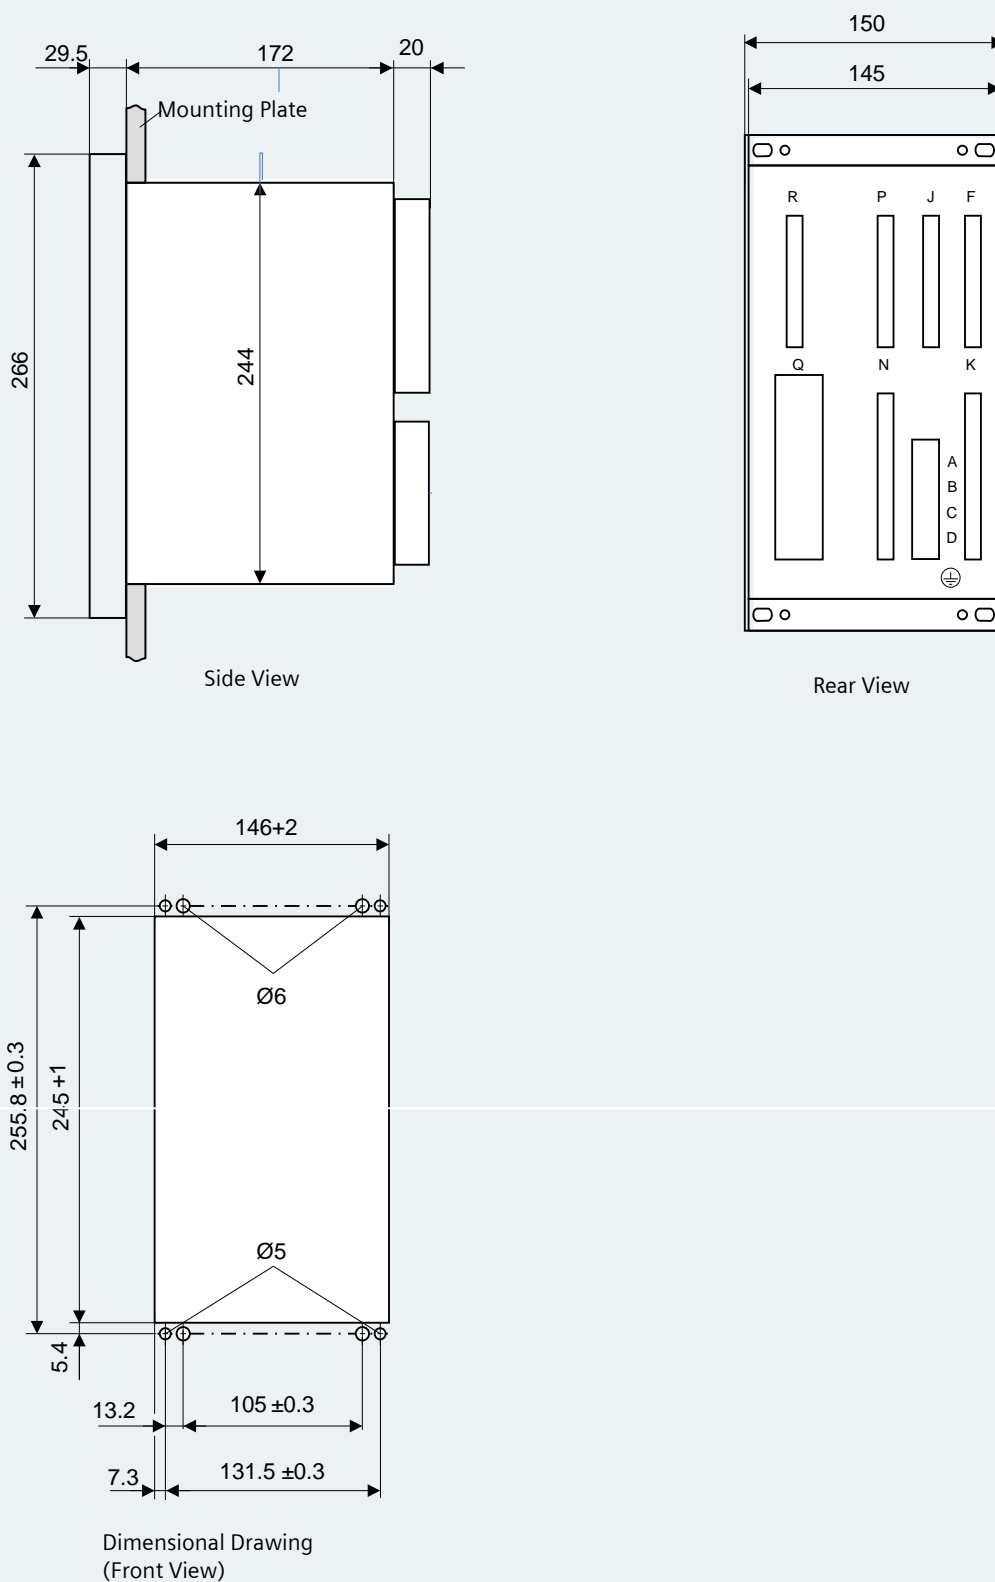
/118 Dimensional drawing for SIPROTEC 7SJ66 (housing size 1/3)
